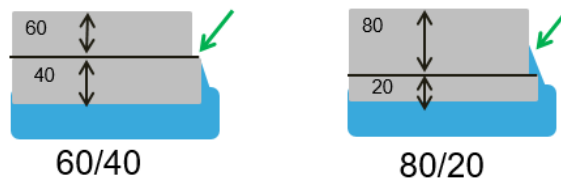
Wafer Sawing Step Cut Ratio analysis using 2 sample T-test
